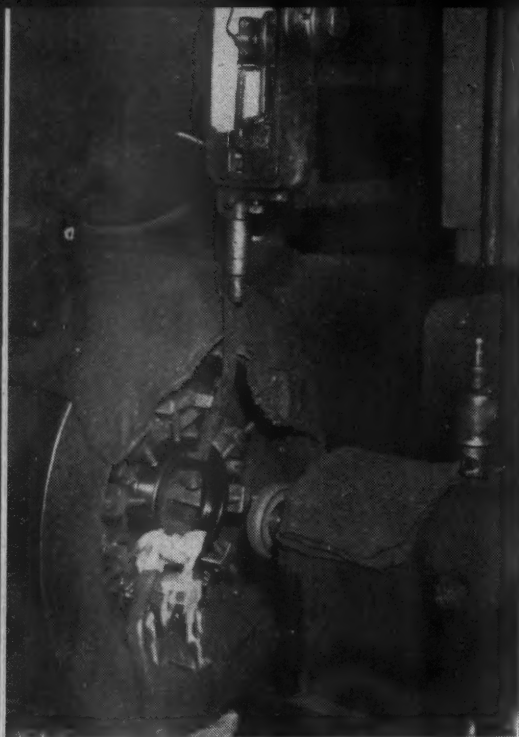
Tolerance gage with micrometer adjustment and three-position electrical contact lever (rough, off and finish) controls grinding cycle. Spring tension guide arm under gage rides groove radius of bearing race and actuates contact lever.
